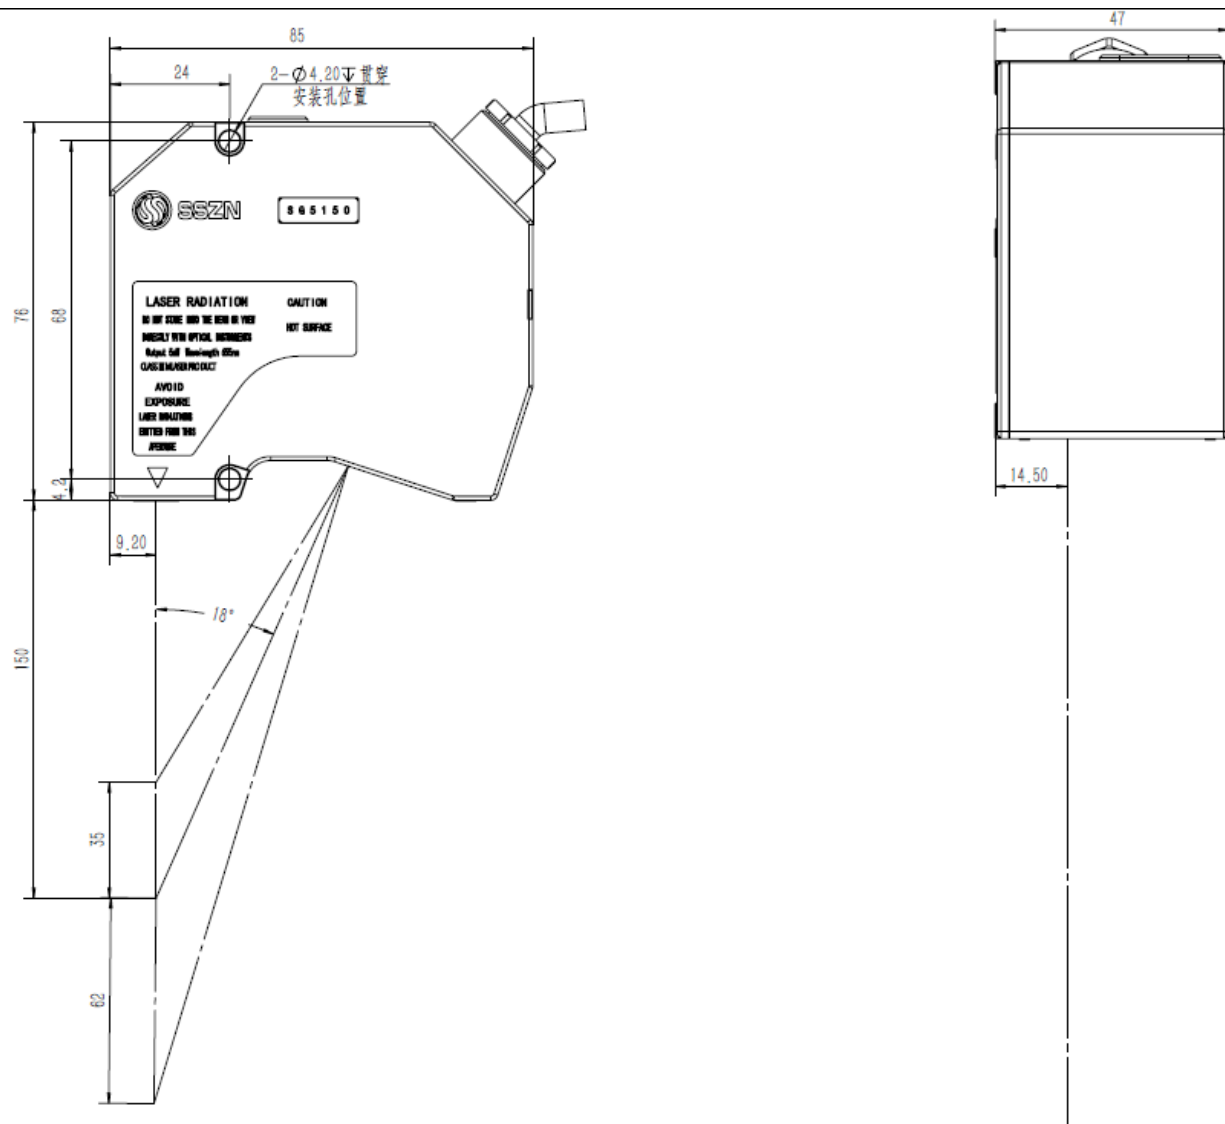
SG5150/5 Sensor Head dimensional diagram Unit (mm)
